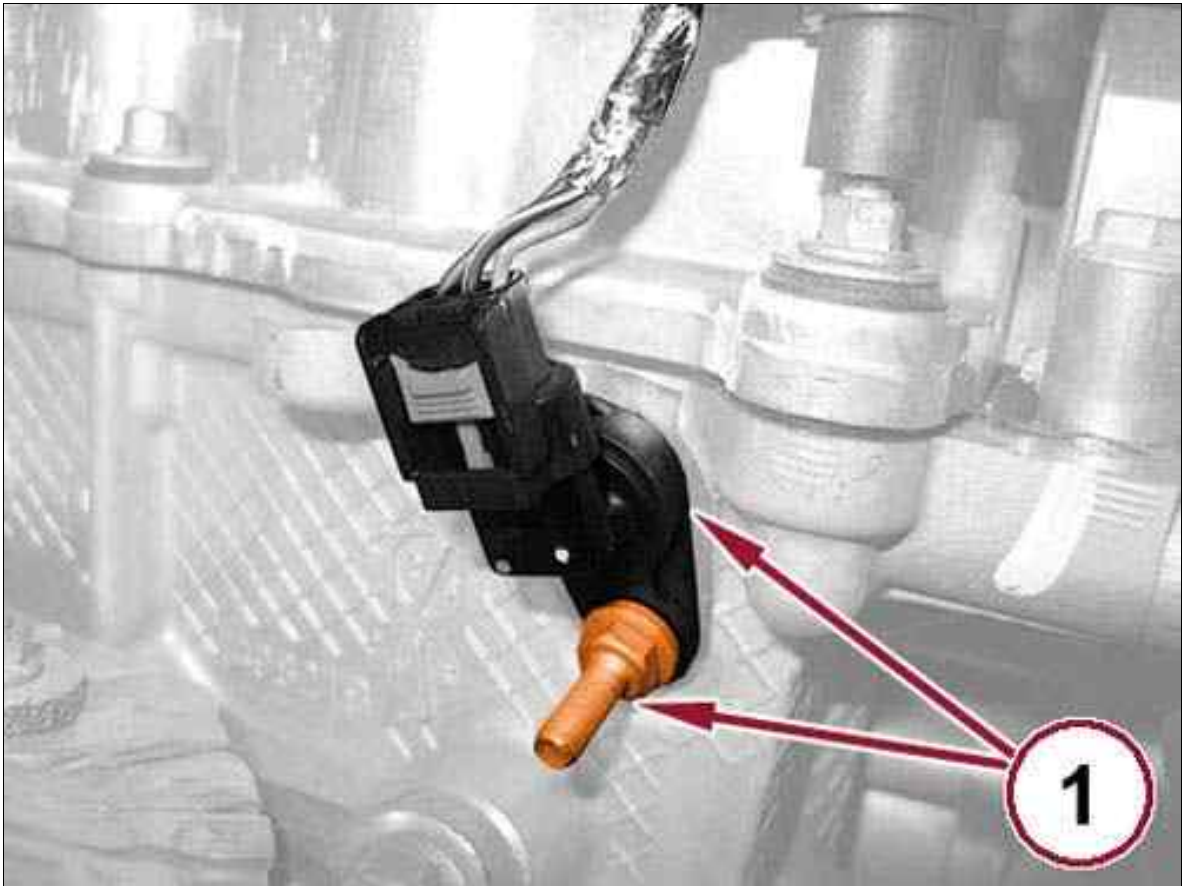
Camshaft Position Sensor Heat Shield & Nut
